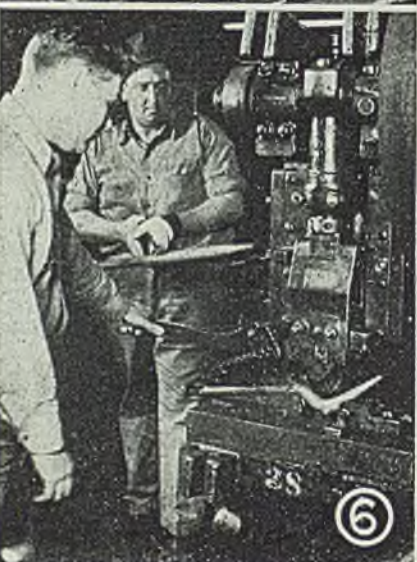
Overall view showing initial bend in forming the horn, using two-step roller type die. Then work requiring stroke longer than press can work, can be handled without difficulty. See Fig. 4
